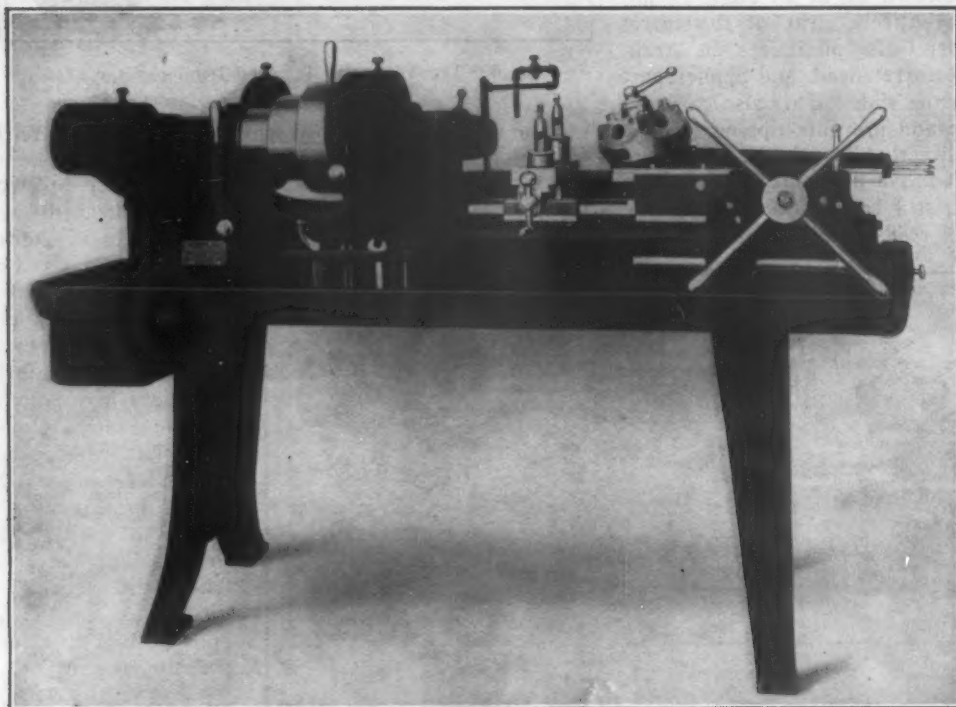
The No. 3  $1\frac{1}{4}$ -In. Tilted Turret Screw Machine Built by the Wood Turret Machine Company, Brazil, Ind.
